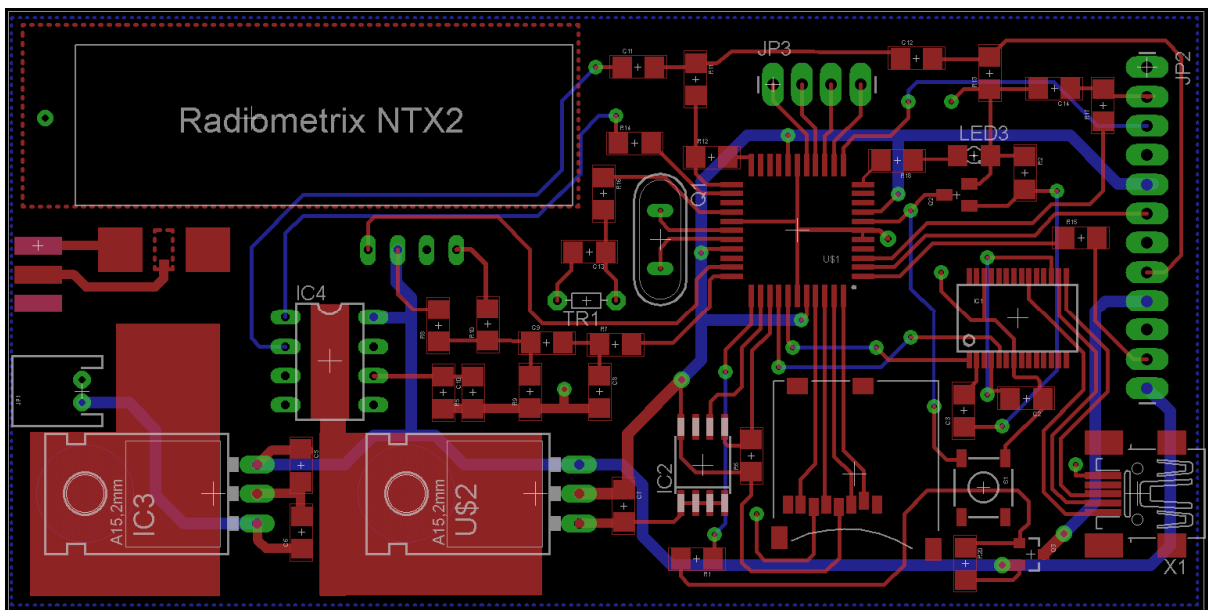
Eagle PCB design showing top and bottom layers simultaneously
